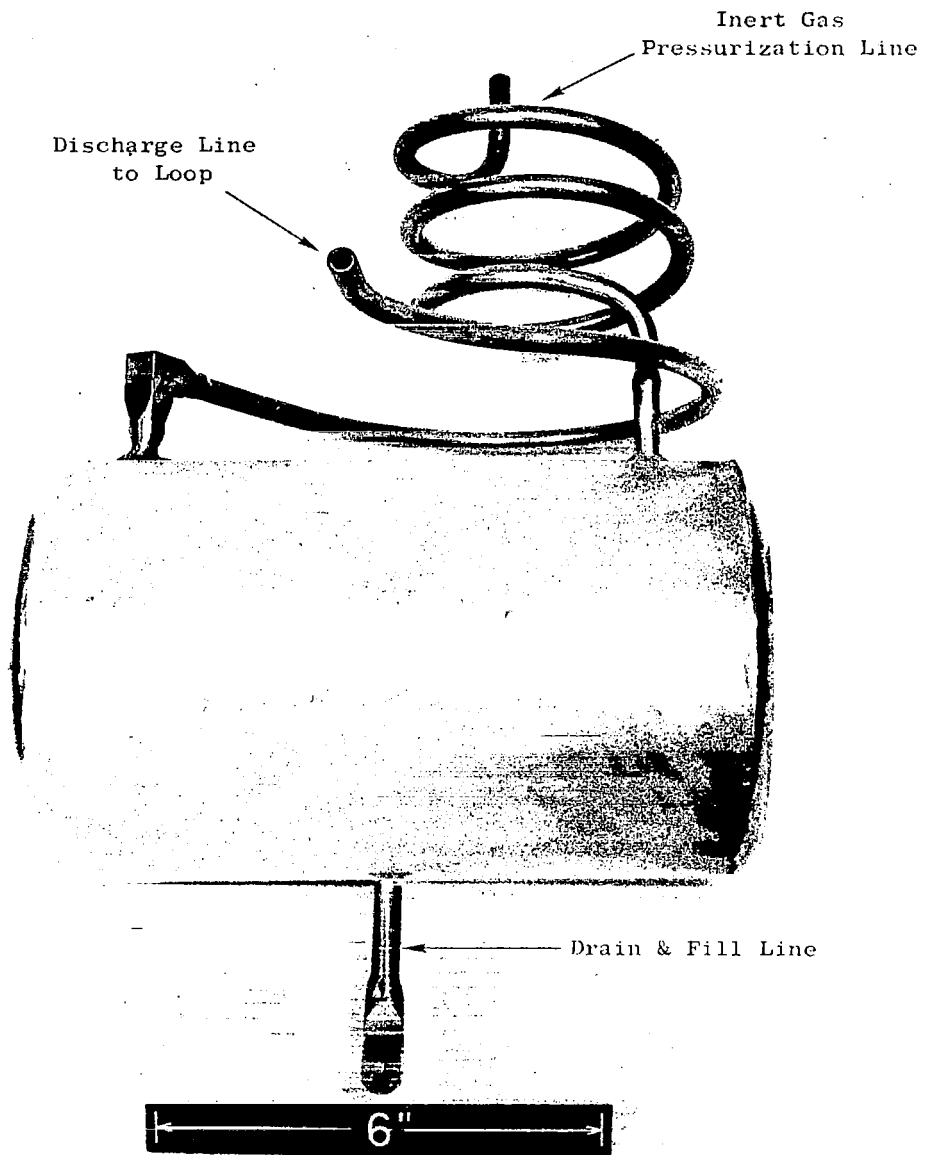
Cb-1Zr Surge Tank Assembly. (C67071831)
